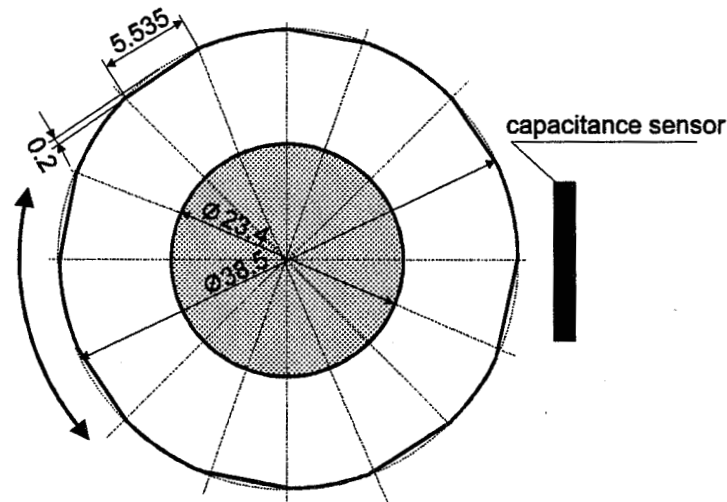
Cross section of the specially designed rotor shaft for the sensor bandwidth test[unit : mm]
